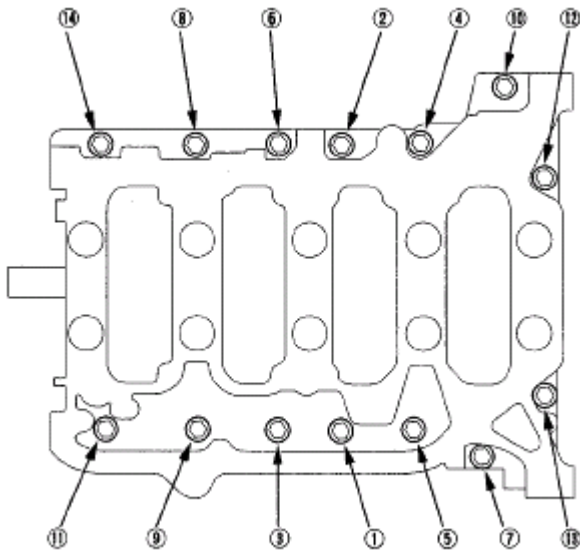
Identifying Bearing Cap Bolt Tightening Sequence
